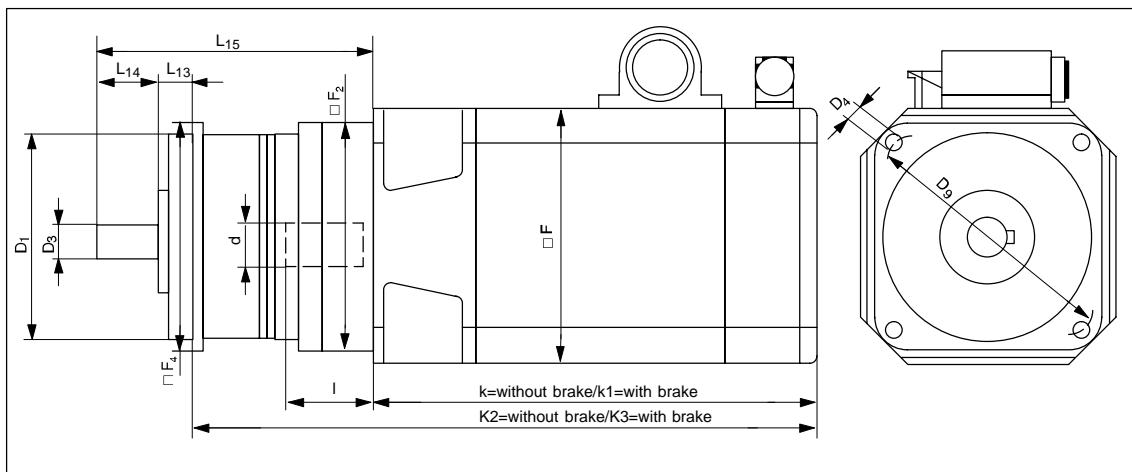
1FT6 series with 1-stage planetary gearbox (alpha company), dimensions refer to Table 3-11
